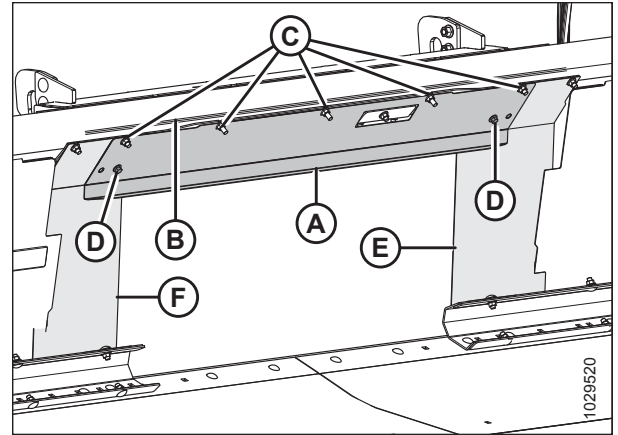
IDEAL™ Shield and Side Panels Shown, Challenger® and Massey Ferguson® Similar – Front View
